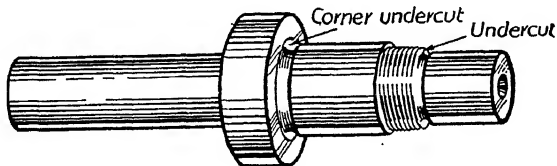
The method of undercutting where the face of a shoulder requires grinding.
